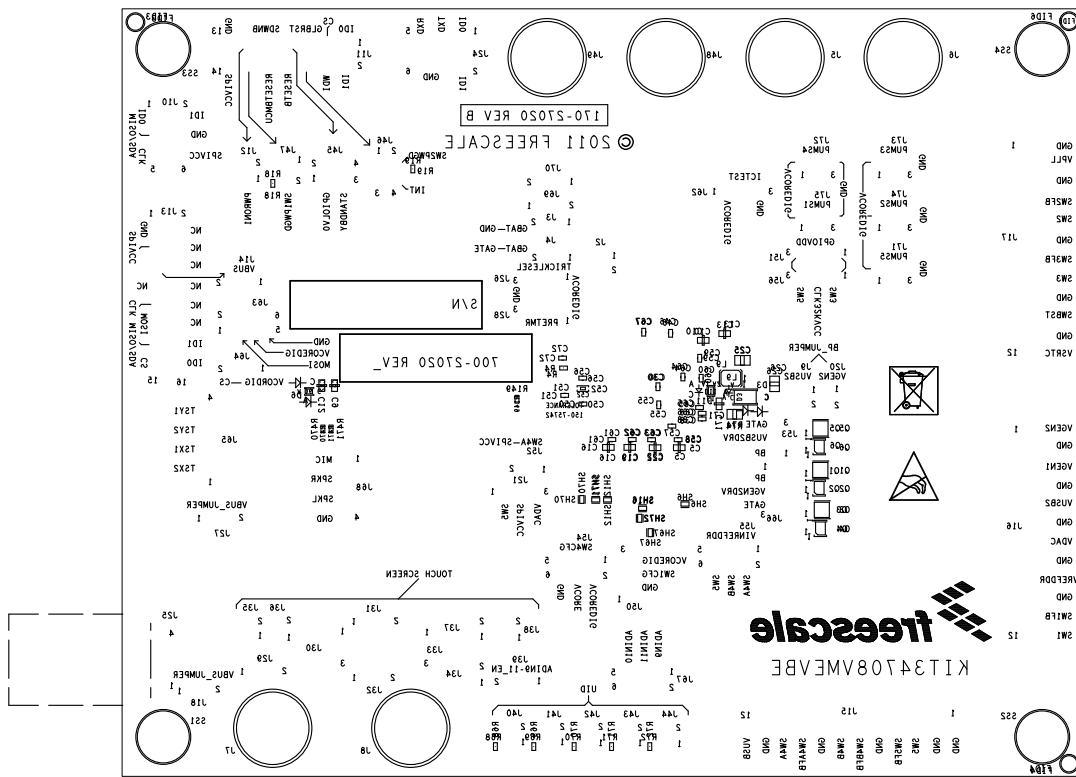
KIT34708VMEVBE (Rev. B) Assembly and Silkscreen Bottom Layer
